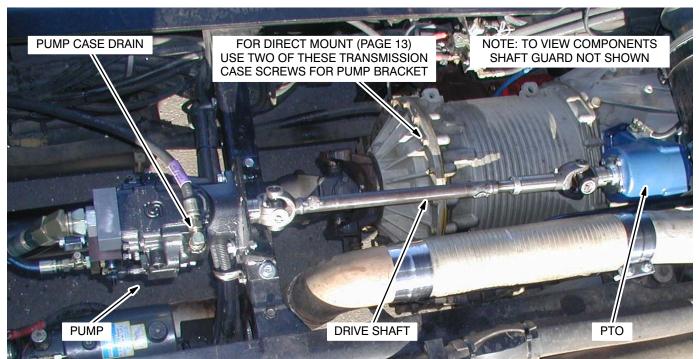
TYPICAL ARRANGEMENT OF PTO, HYDRAULIC PUMP, DRIVE SHAFT AND CASE DRAIN
